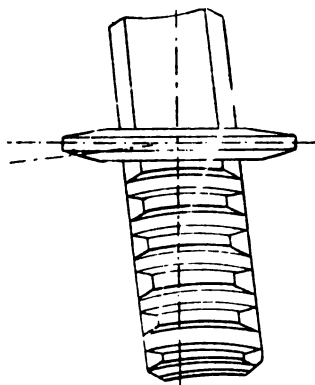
Cutting Worm Wheel Teeth with Common Cutter.
